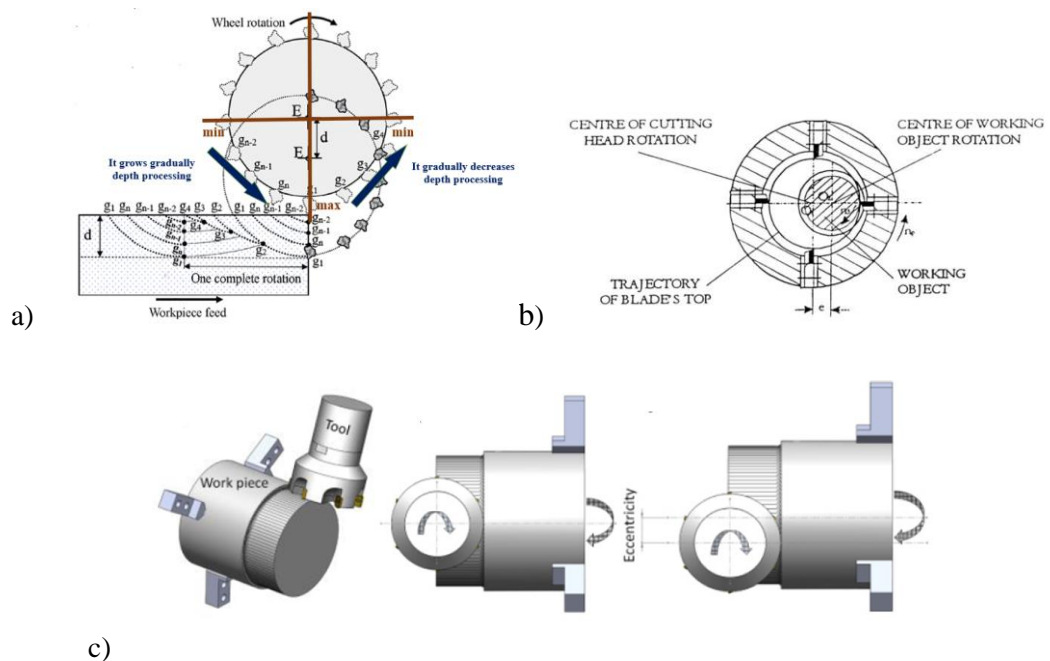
Eccentric machinings: a) eccentric grinding, after [1], b) eccentric external threading, on lathe [2], c) turn-milling machinings [3]
